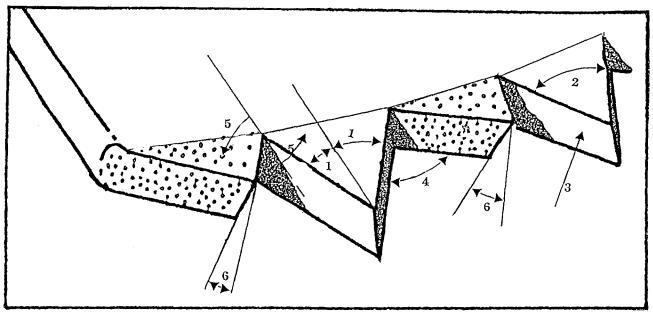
Saw blade geometry. 1. Rake angle. 2. Wedge angle. 3. Rake plane. 4. Clearance angle. 5. Setting angle. 6. Chamfer angle.
